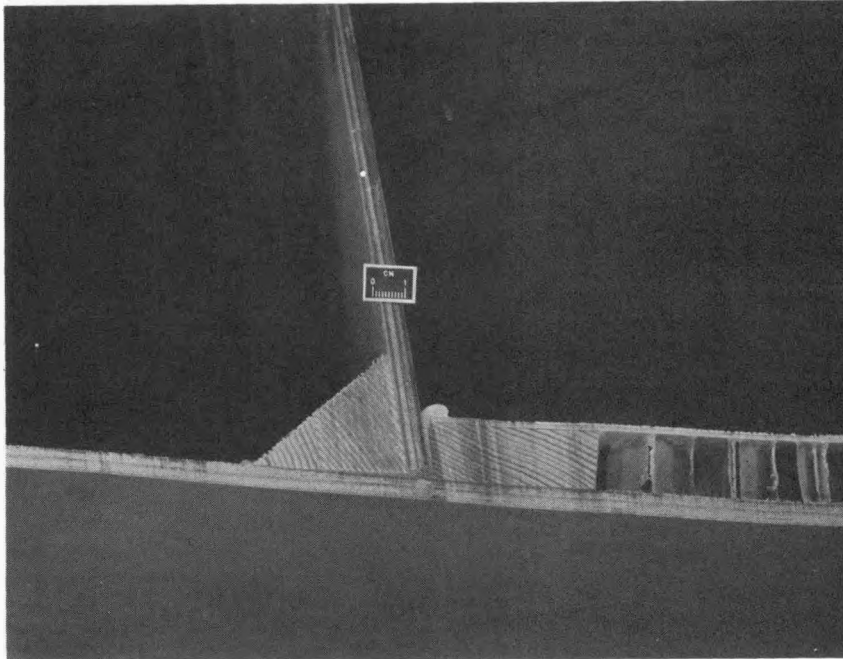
Shear web and Vertical reinforced afterbody panel in outboard portion of 20 foot test section.
